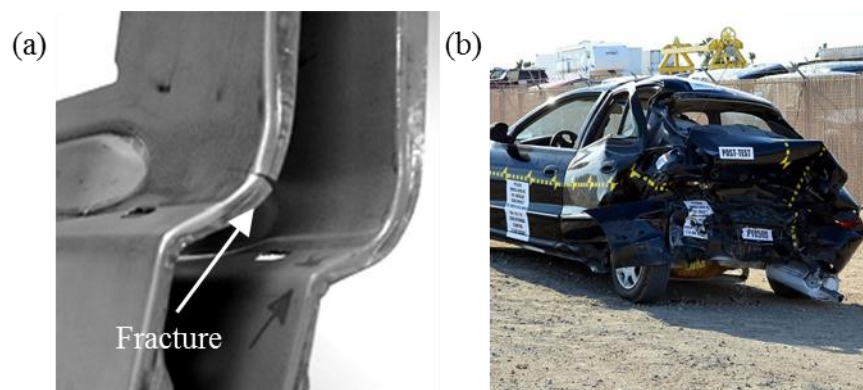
Damage problems in automotive: (a) edge fracture observed in carbody manufacturing [82] and (b) car crash test of a 2000 Hyundai Elantra [83].
